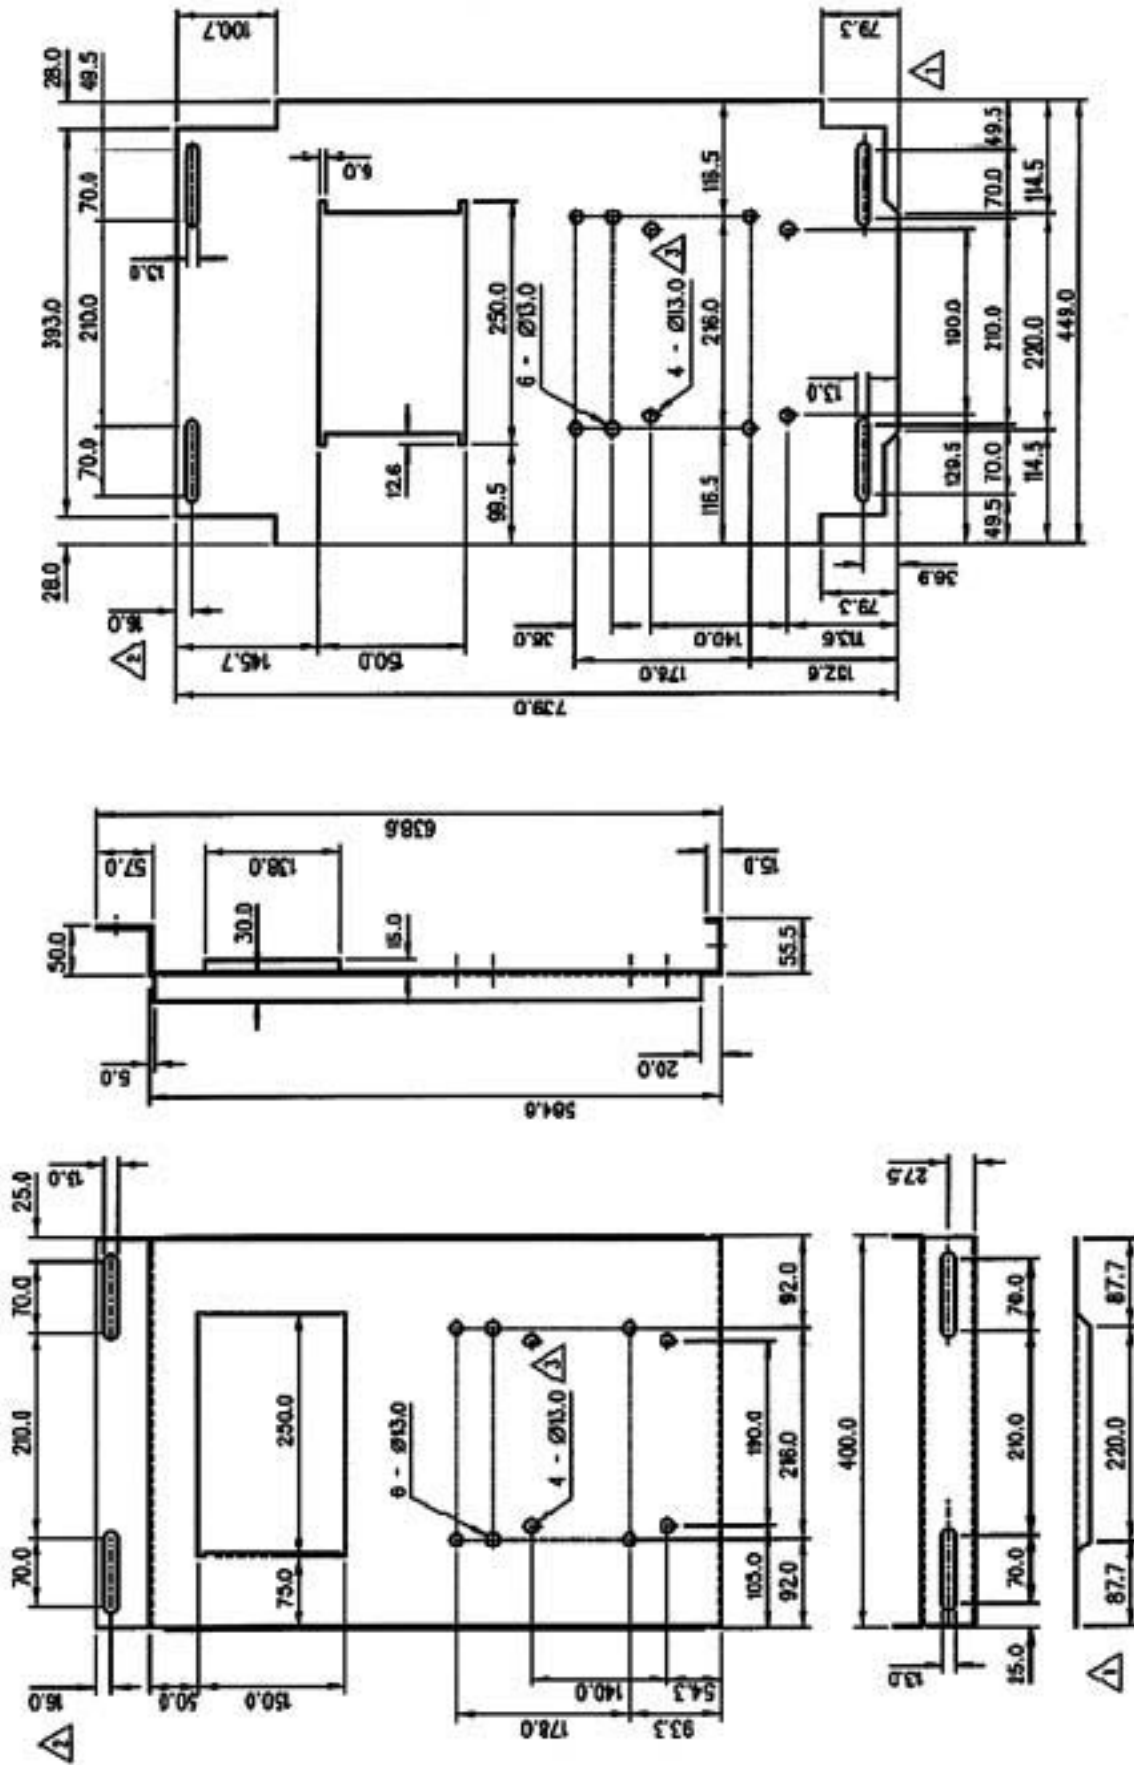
(c) Motor Mounting Base for UATP/TYP/T/TY700/850A
